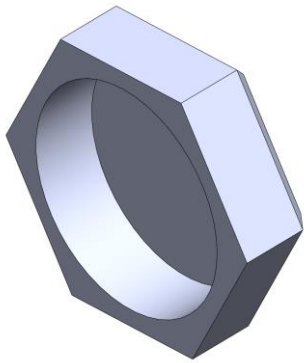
Front of the bearing capsule, where a bearing can be press fitted.
